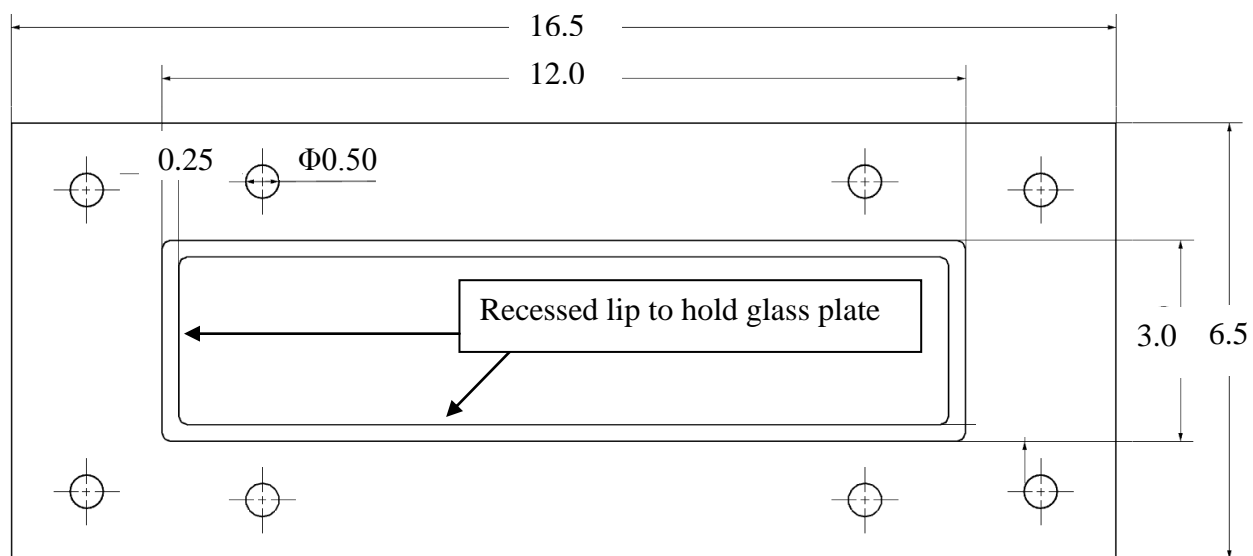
Orthographic view of the side plate. Dimensions are in inches.
